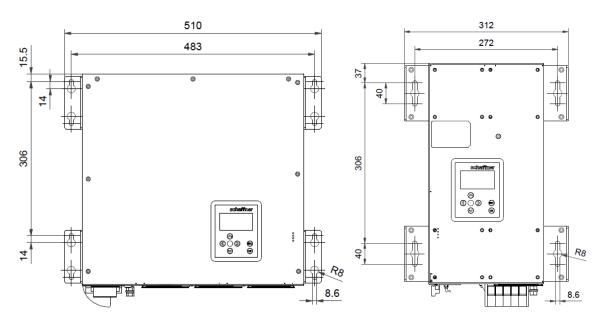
Dimensions [mm] drill-pattern for wall-mount (book and flat mounting)
